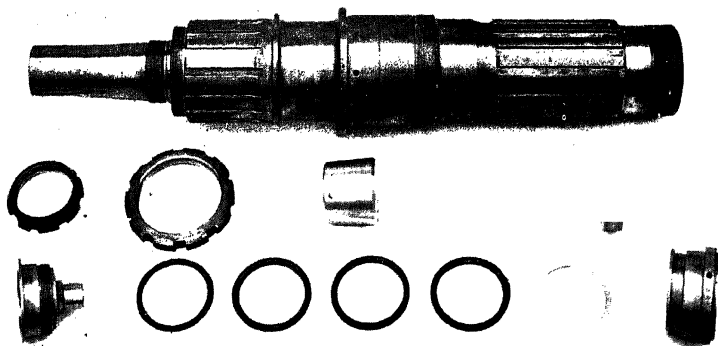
Details of Fiat A. 80R.C.41 airscrew shaft.
